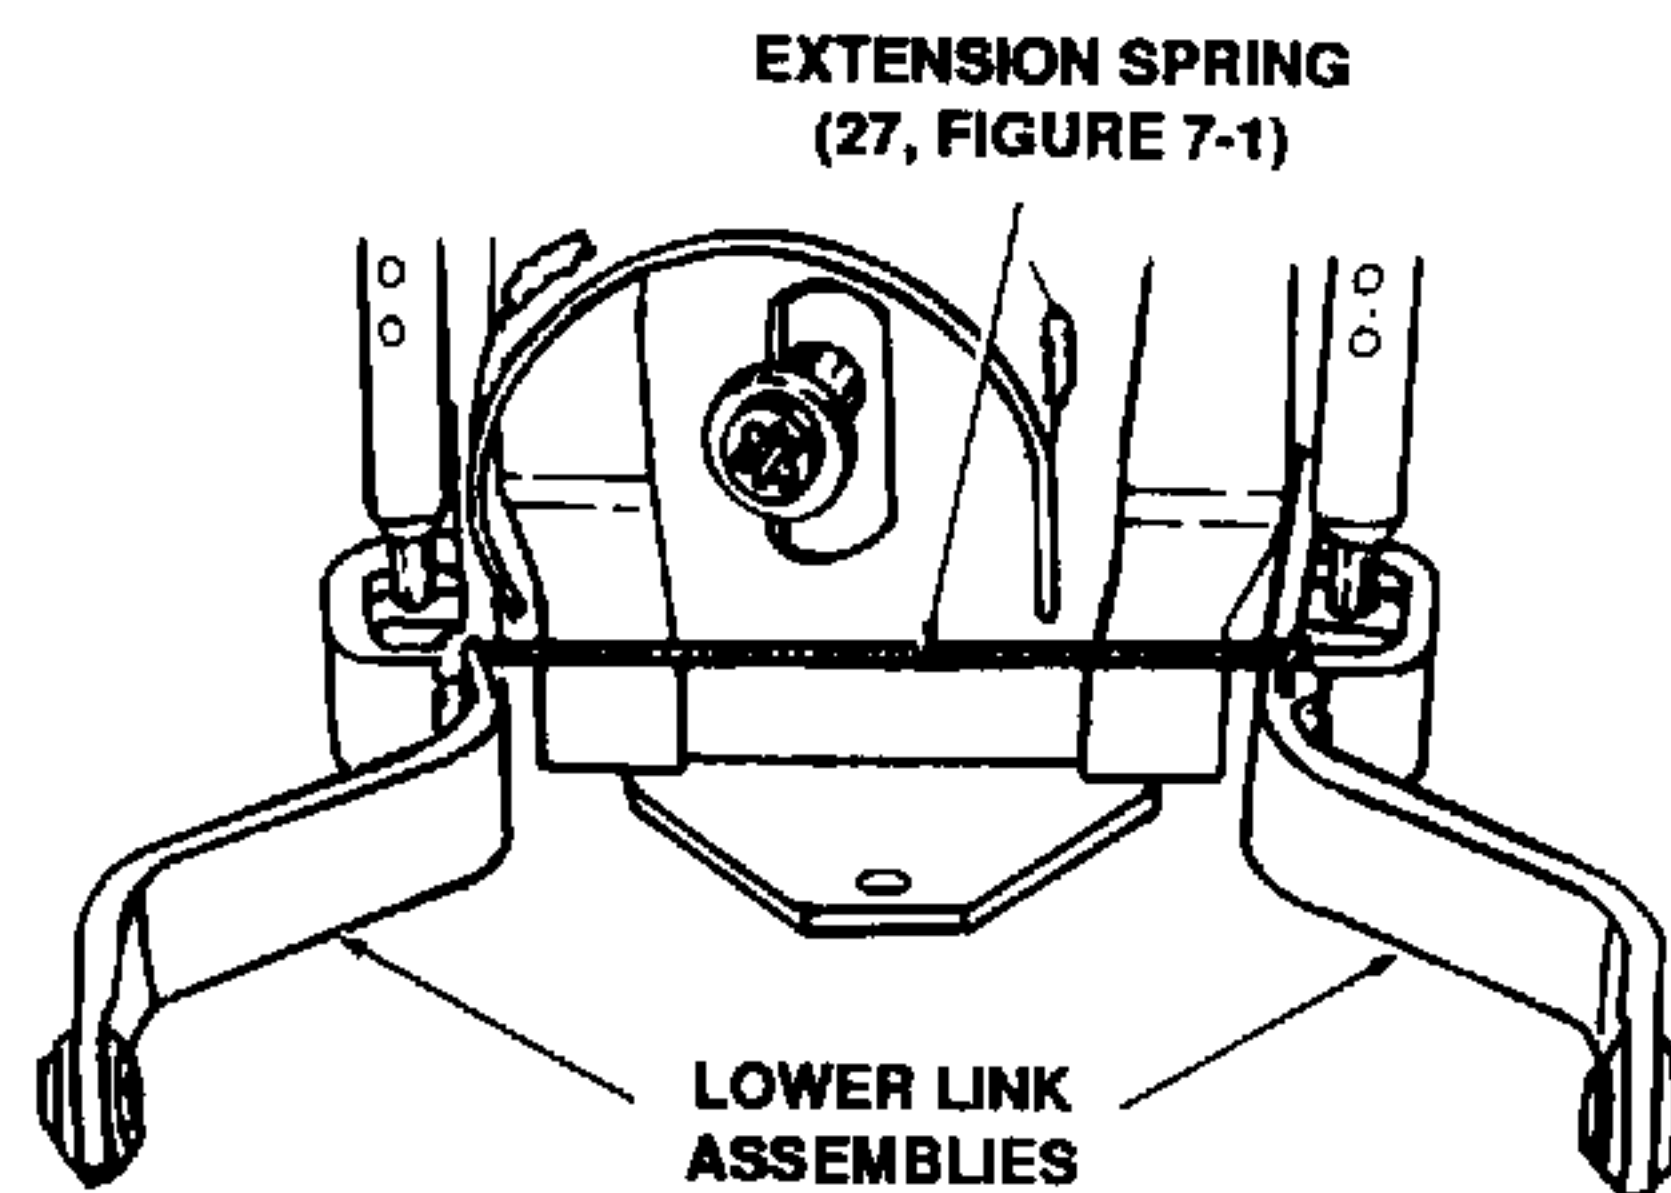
Securing Extension Spring to Lower Link Assemblies.
